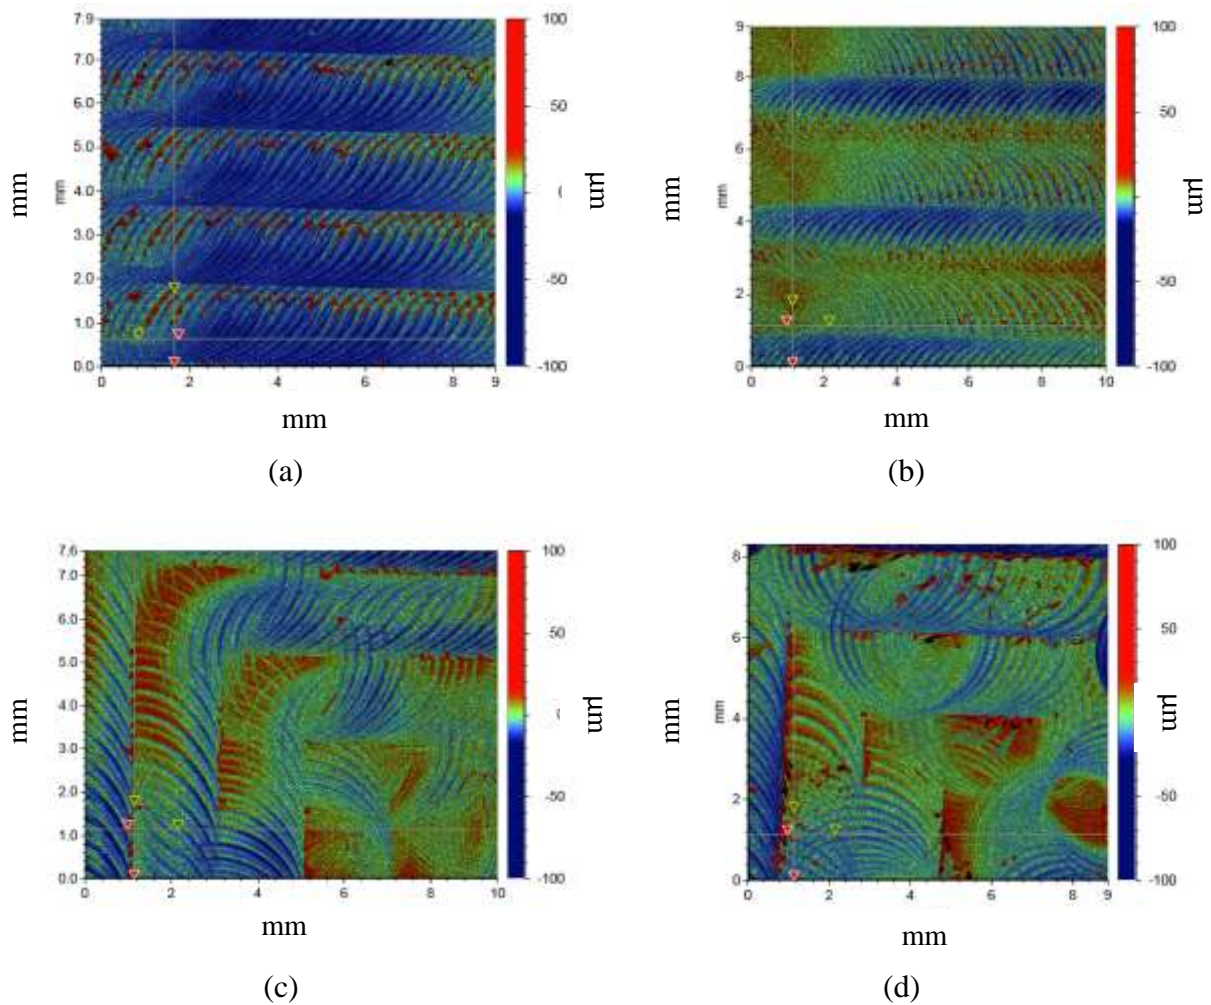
(a) Zig tool path, (b) Zig-Zag tool path, (c) Follow periphery tool path, (d) Trochoidal tool path.
